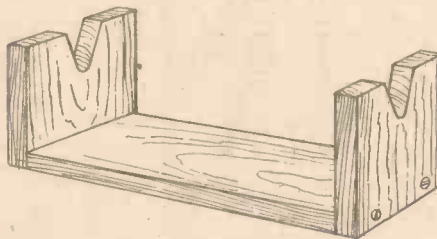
Details of the wooden stand on which the armature is mounted for re-winding.
